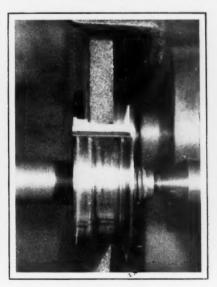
Another Example of the Grinding of the Contour of Formed Tools
